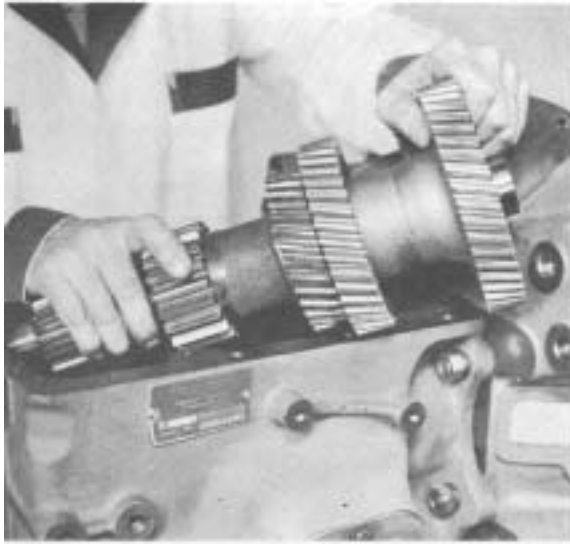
Tip rear of countershaft down and into transmission case. Feed rear of countershaft through rear countershaft bearing bore. Move countershaft forward and into pilot bearing. CAUTION: Do not disrupt countershaft needle bearing.
